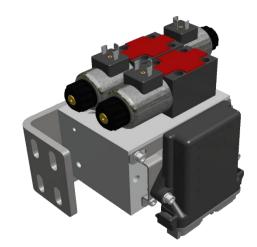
MANIFOLD BRACKET WITH A MANIFOLD AND STEERING CONTROLLER MOUNTED
